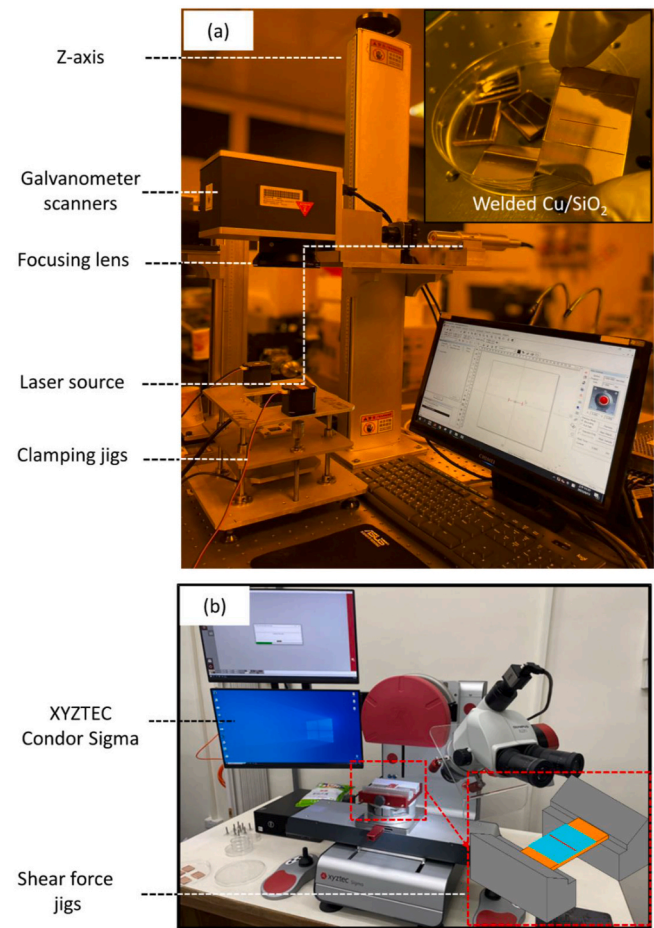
Displays photographs illustrating the experimental setup for laser transmission welding (a) and the shear force separation measurement equipment (b) utilized in this study.
